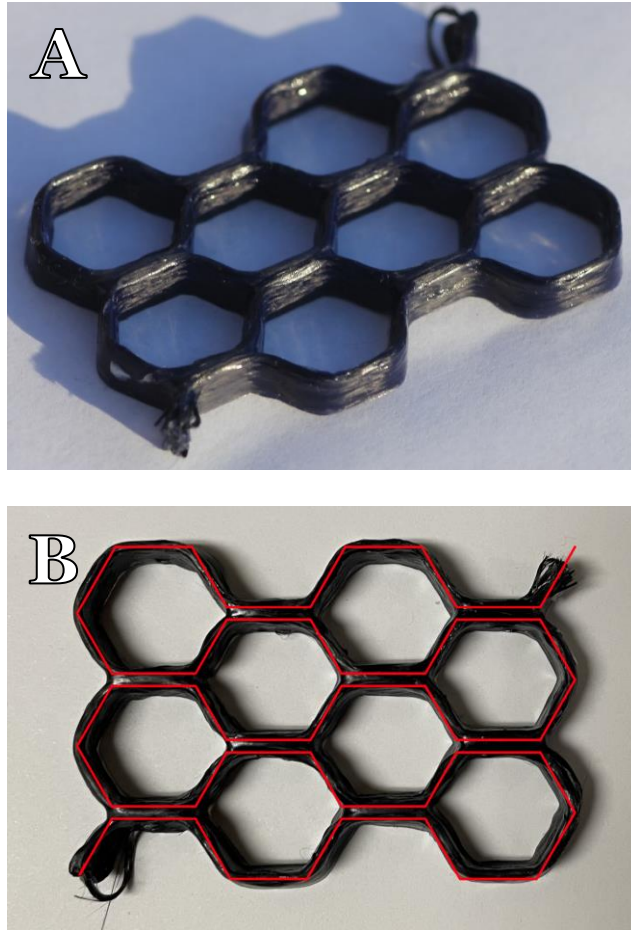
(a) Honeycomb sample printed with old spool enclosure and latest print head (b) with overlay of original G-code path
